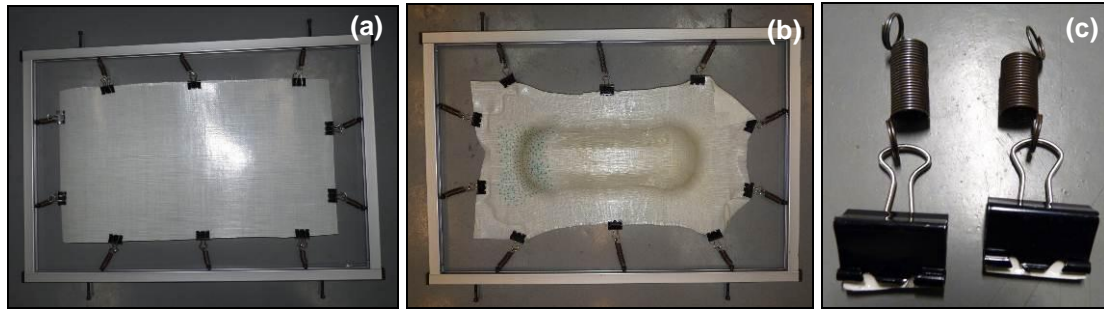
Preliminary testing using springs and clips to apply tension, a different sheet perimeter was chosen for the final experiments. (a) sheet before forming (b) sheet after forming (c) Two types of spring used to induce tension in blank during forming. Longer springs (25-26 turns) were use at the ends, shorter springs (19-20 turns) were used at the sides of the blank. Sand paper was glued inside the clips to prevent slip.
